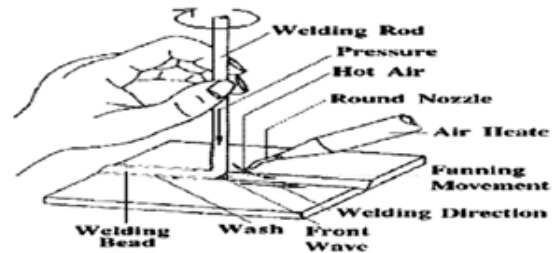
Schematic of hot gas welding, showing the correct position of torch and filler rod for plastic[3].
